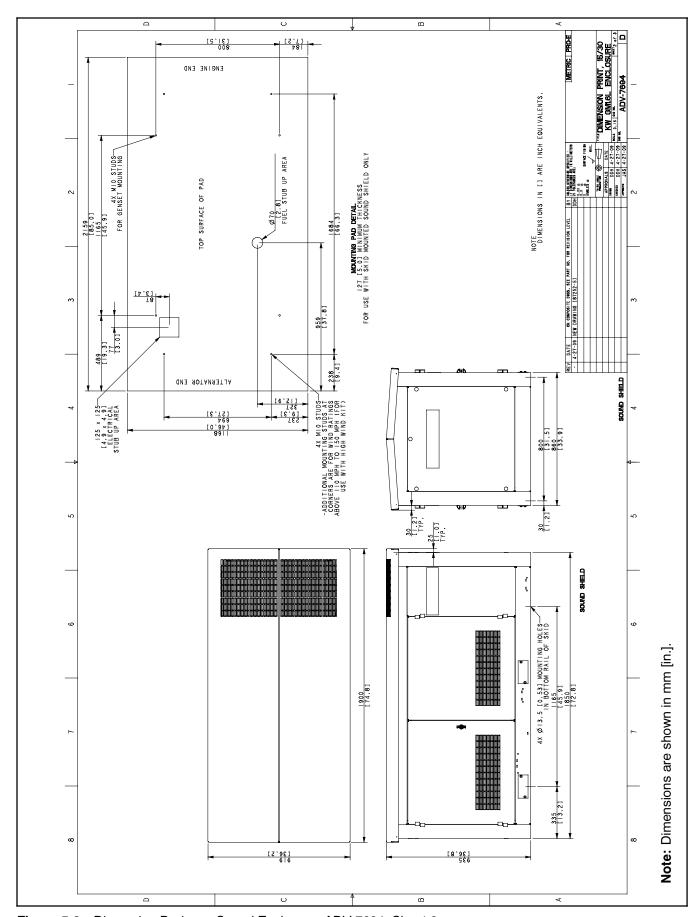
Dimension Draiwng, Sound Enclosure, ADV-7694, Sheet 2
